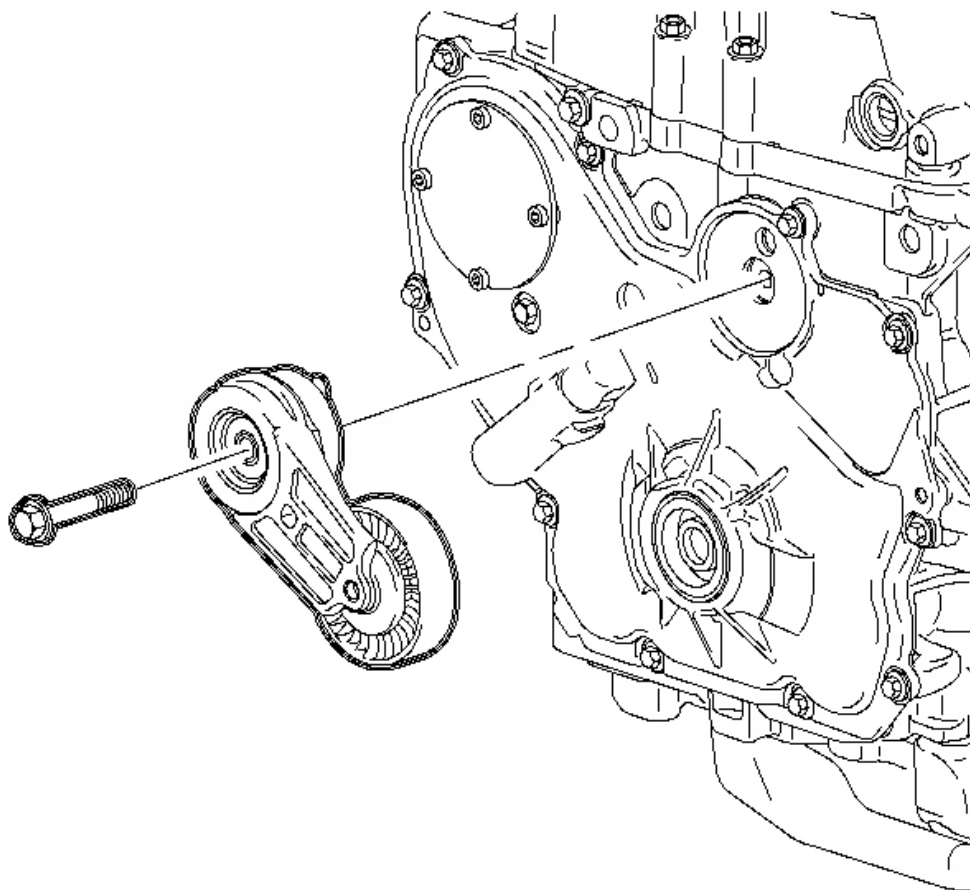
Removing/Installing Tensioner Assembly & Bolt
